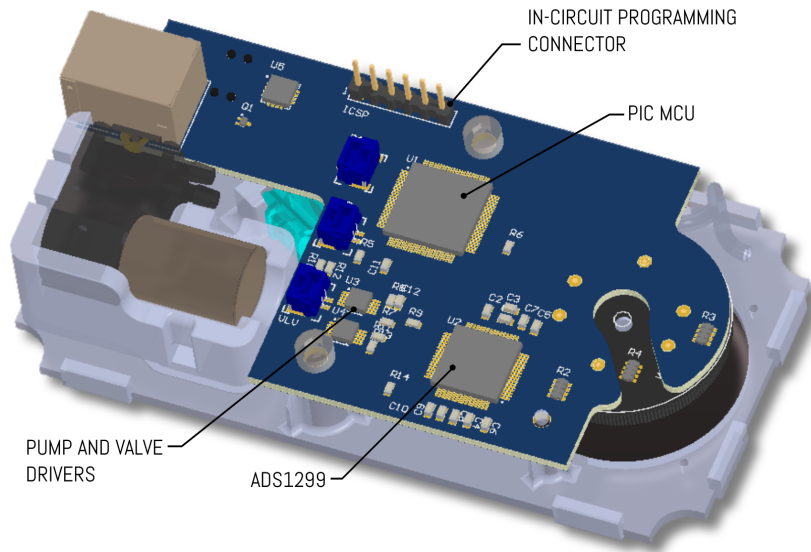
3D view mode of the EAG PCB in Altium Designer
